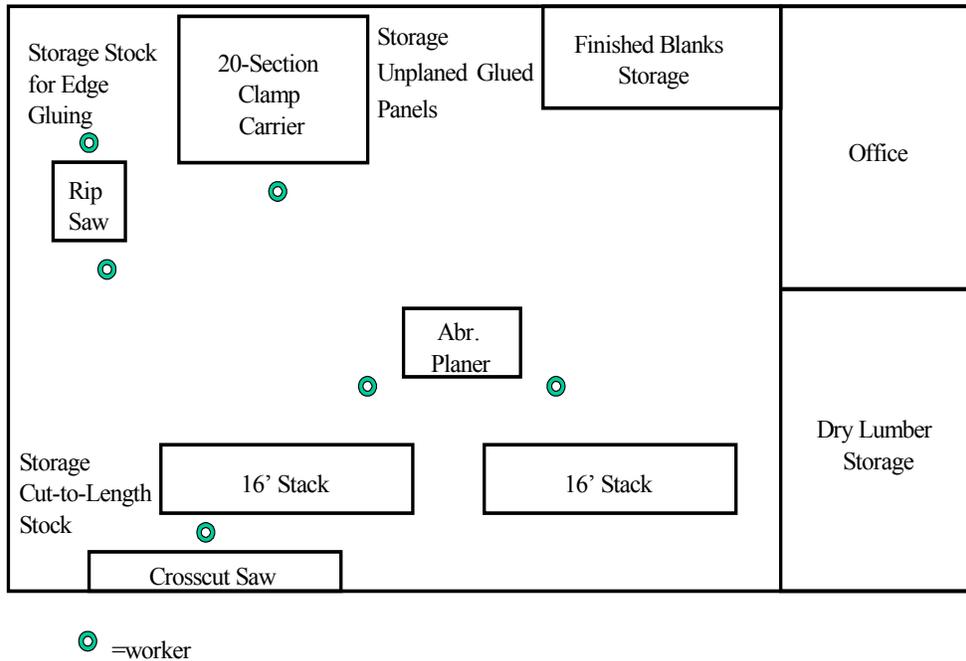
Layout of a Blanks Manufacturing Facility.
